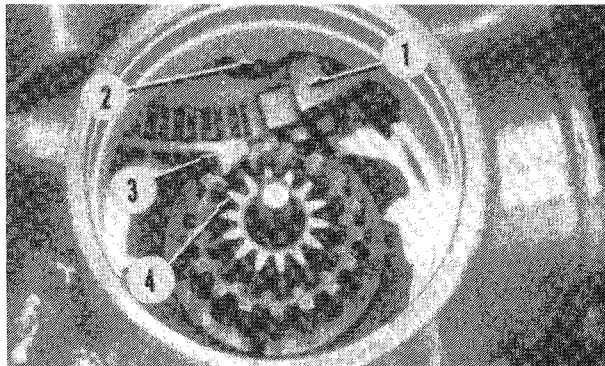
Position speed selector arm so boss on sector (1) clears boss in housing (2) when removing and installing control valve housing cover. Large tooth on sector (3) must engage large slot in rotary valve (4).
